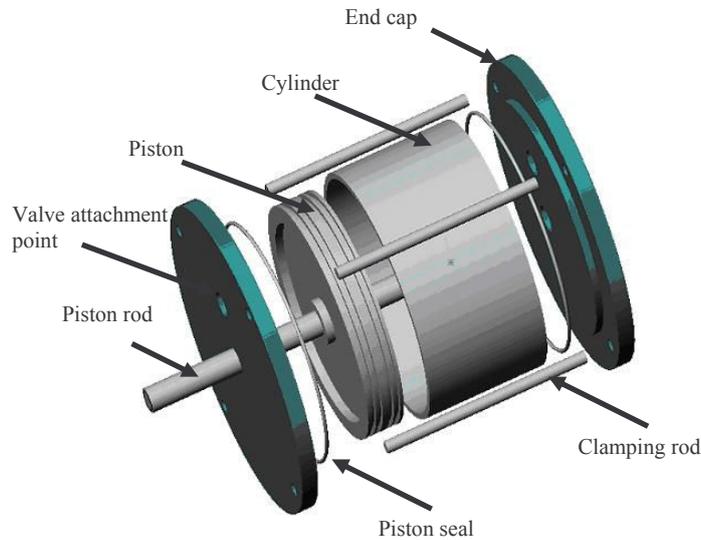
Exploded view of device with the cylinder, piston, end caps, piston rod, piston seal, and clamping rod labelled.
